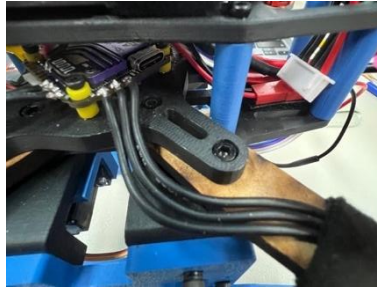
Arm locking screw 1 (two fixing screws, quick disassembly and replacement of the arm)
